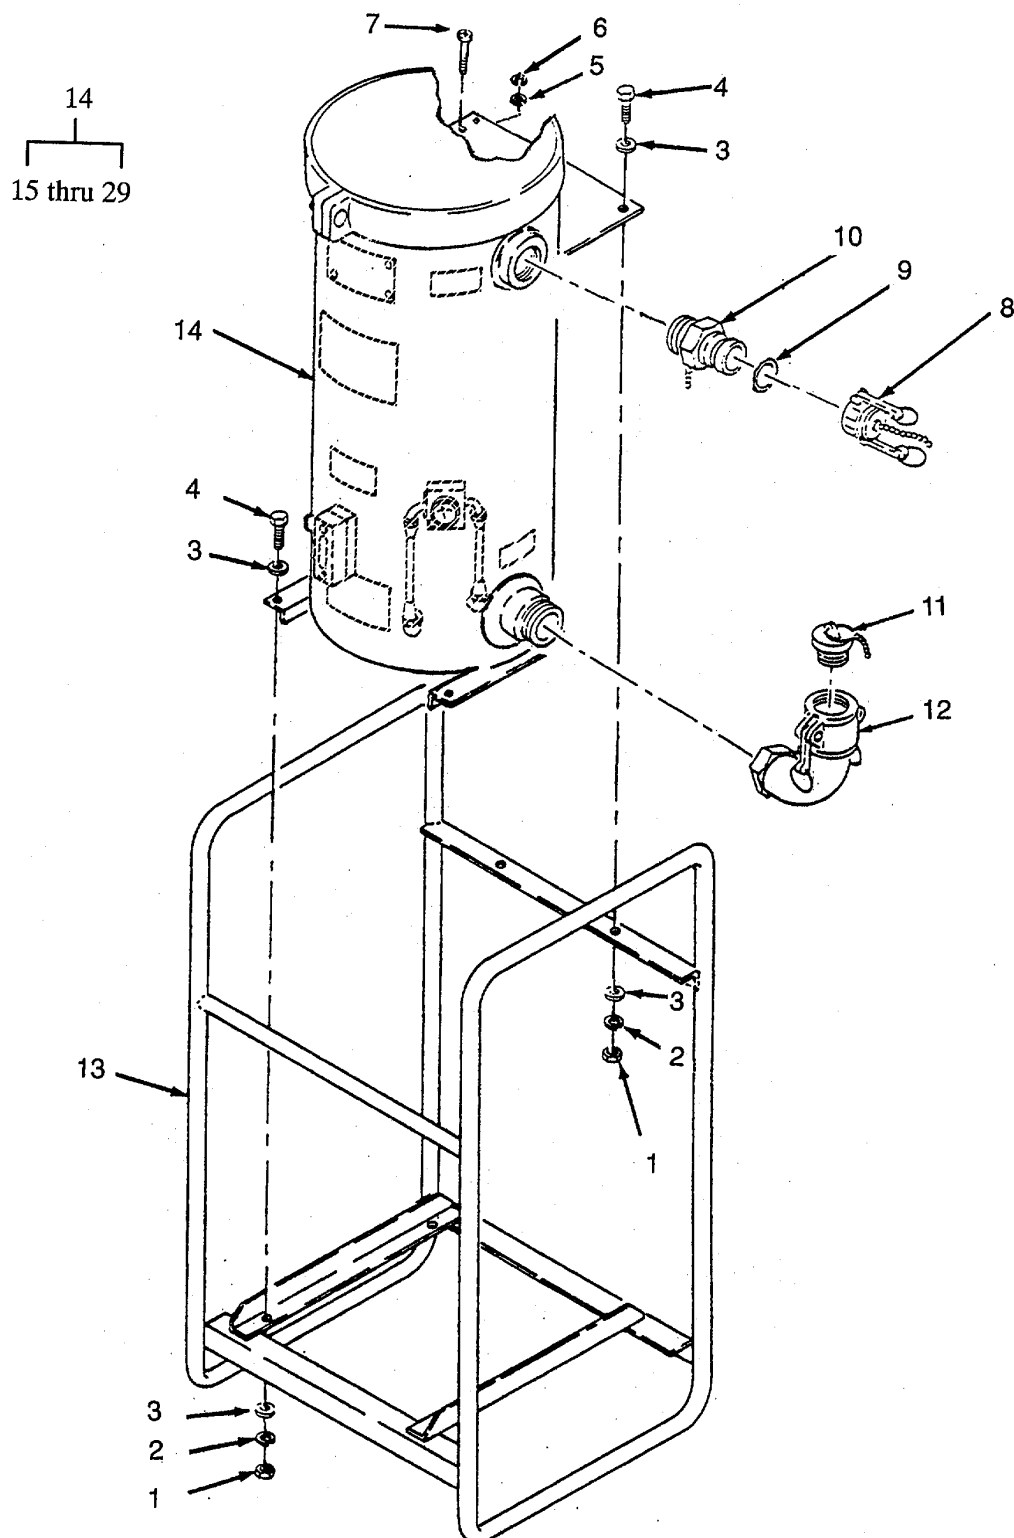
Tank and Frame Assembly (Sheet 1 of 2)
